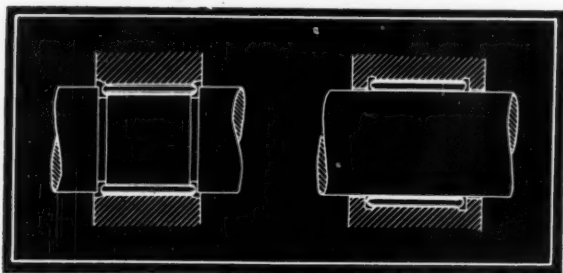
Needle bearings with recesses for pins in shaft or bearing mounting
